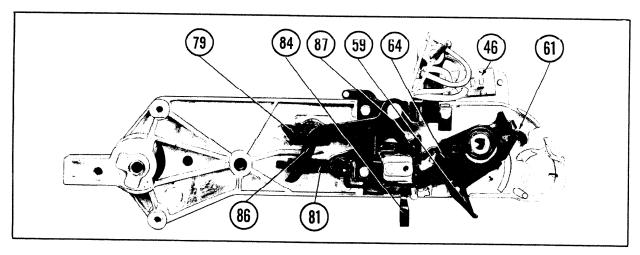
Bottom View of Cycling Mechanism With Slide and Cam Gear Removed.
